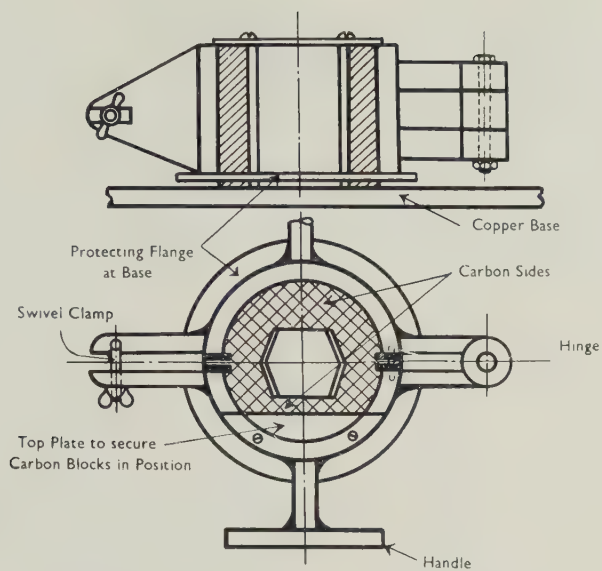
Spectrographic Test-Piece Mould for Casting a "Churchill Block". Size of test-piece $3\frac{1}{2}$ in. high, $1\frac{1}{2}$ in. wide, and $2\frac{1}{2}$ in. broad.
